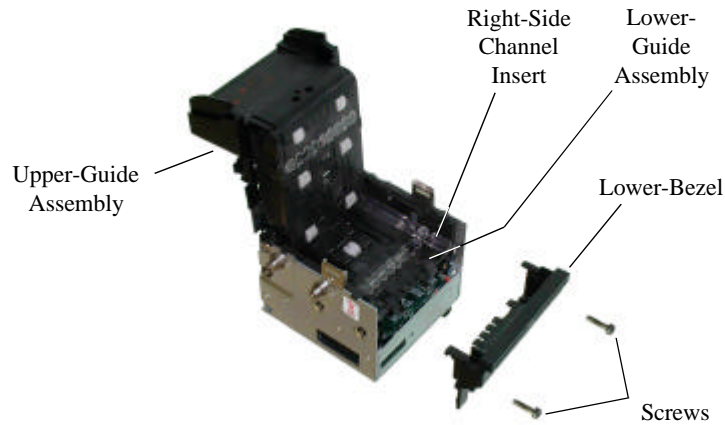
ARGUS-D Validator Head – Lower-Bezel Disassembly
